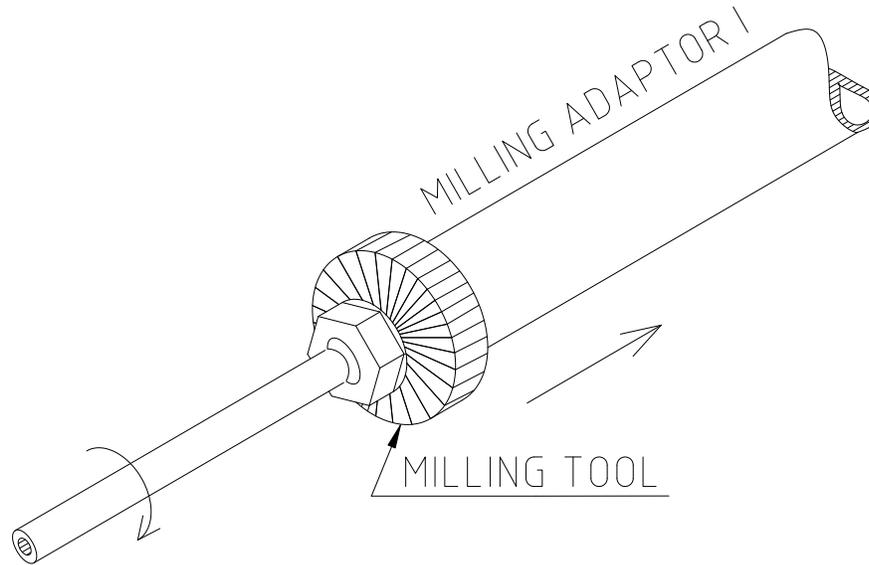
Facing of the seating surfaces on the welded-on pieces
